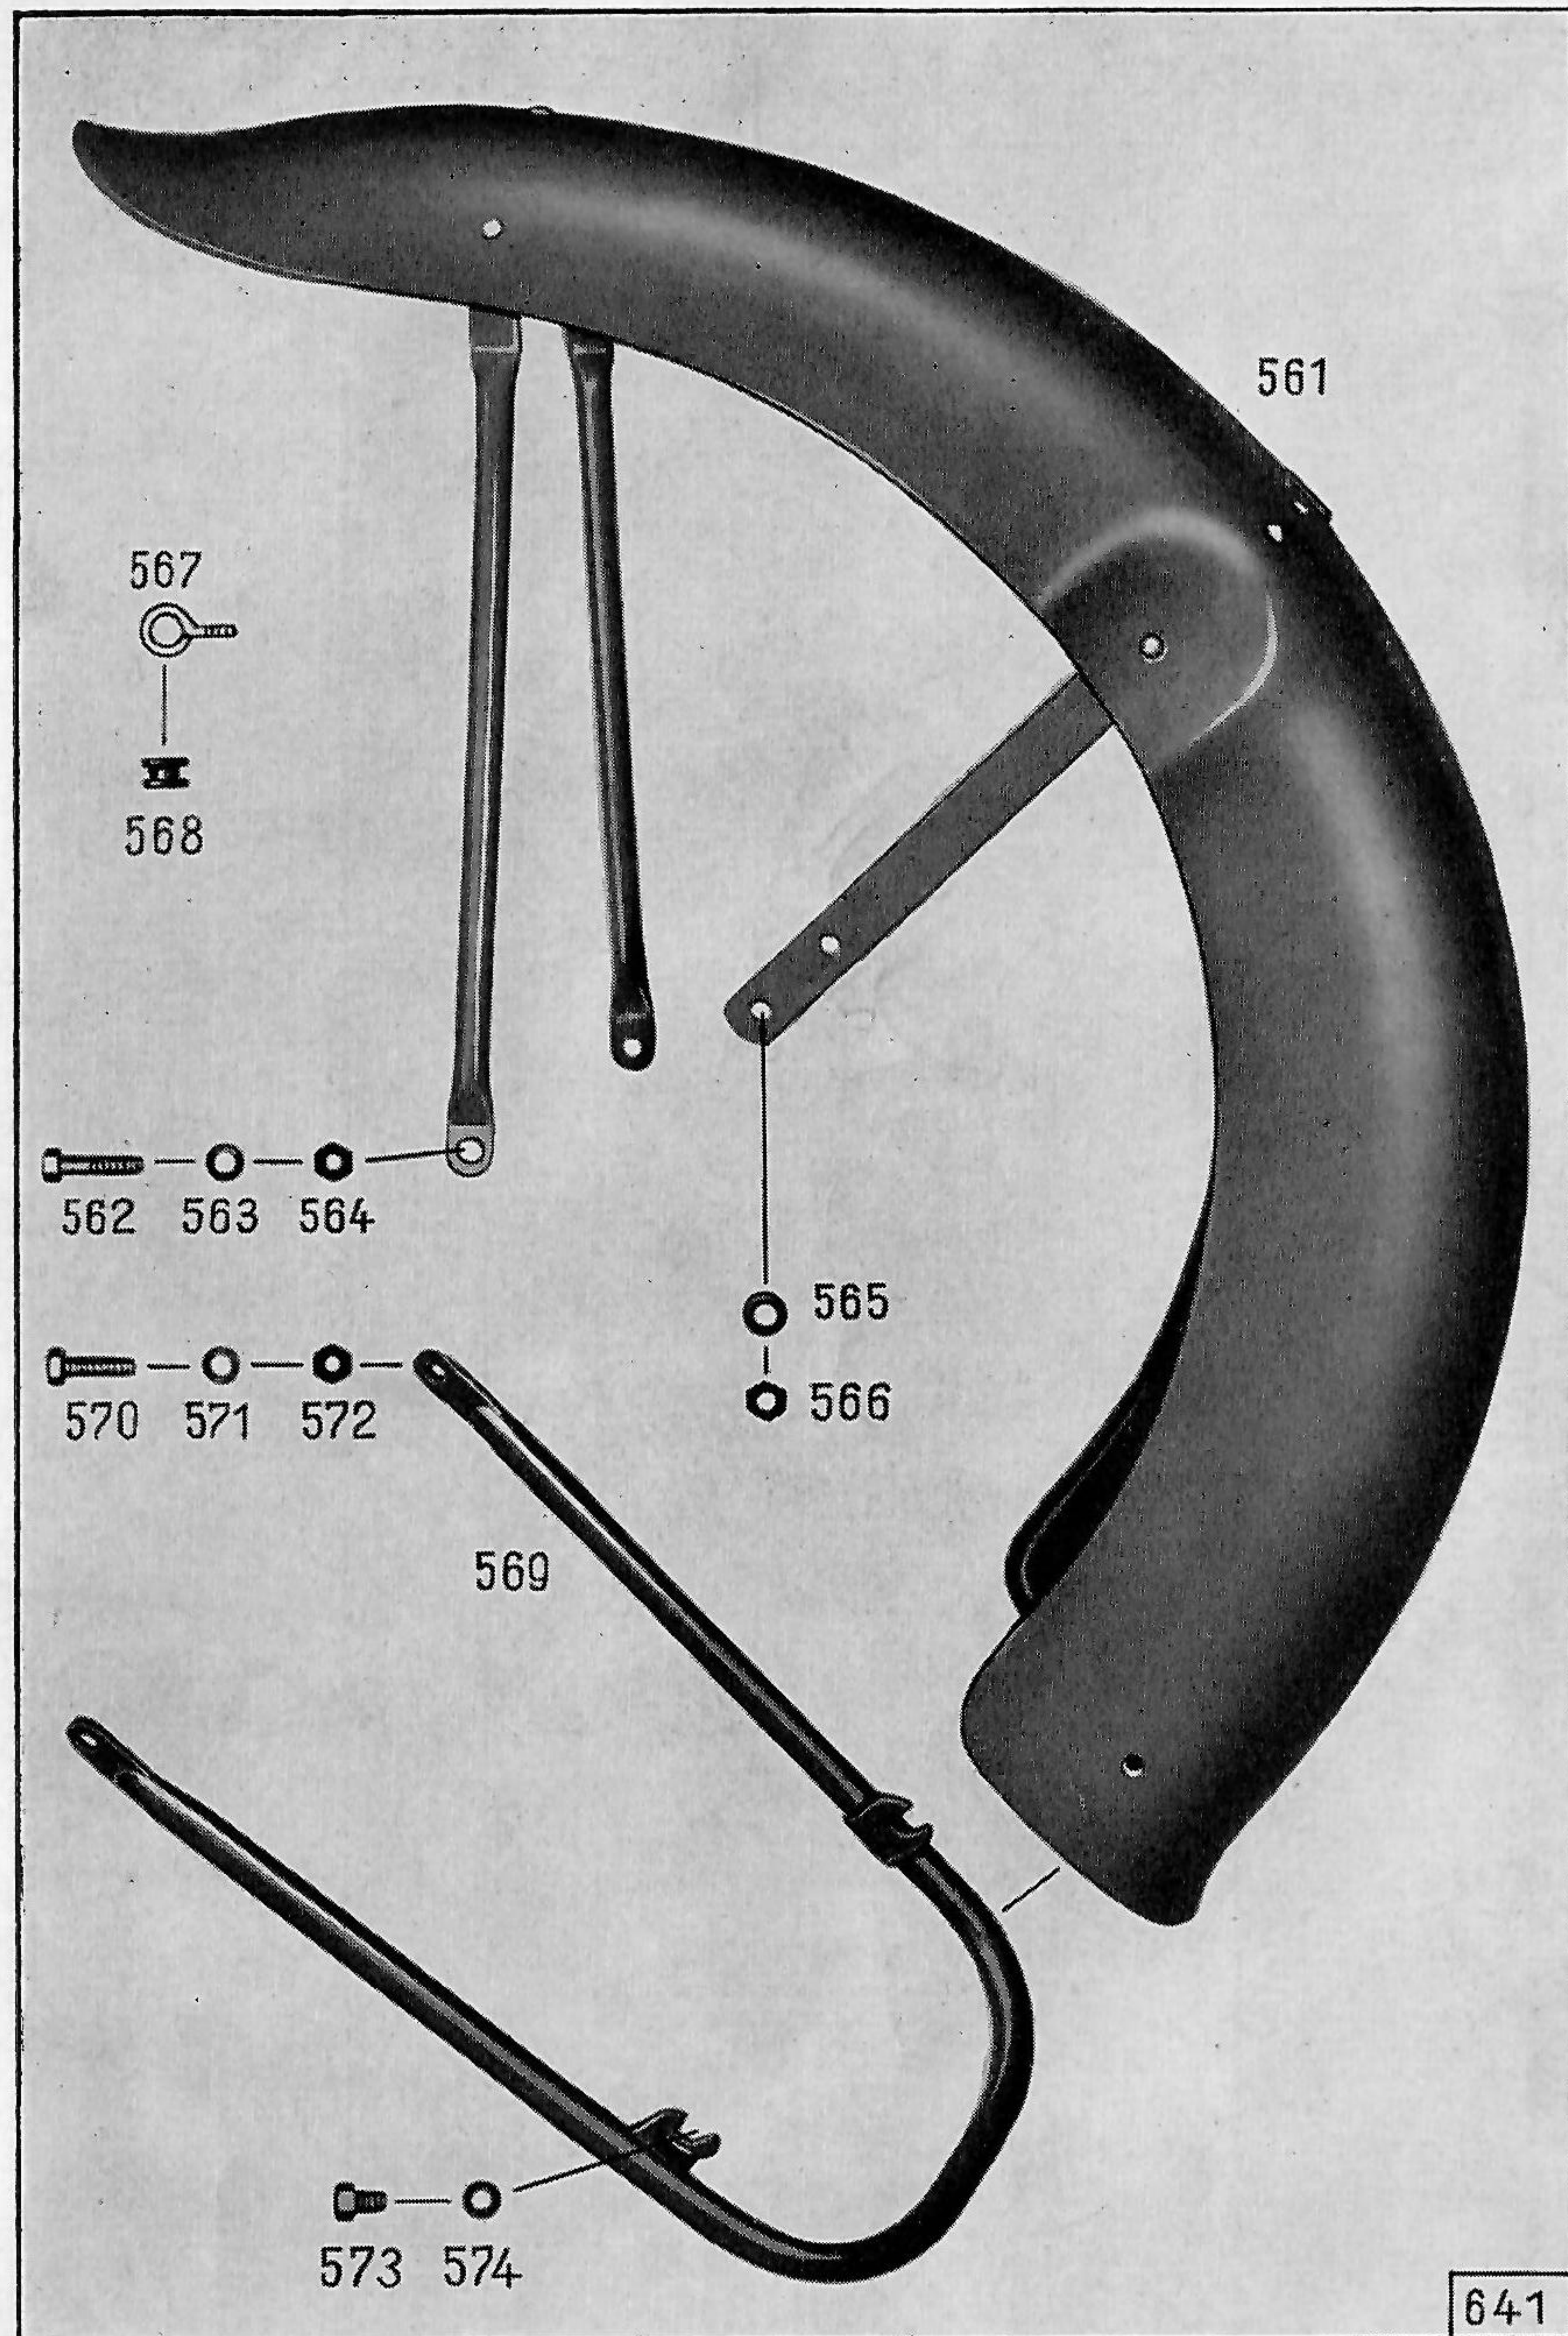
, Group R: c) Fenders, Front Wheel Fender, Front Wheel Stand
